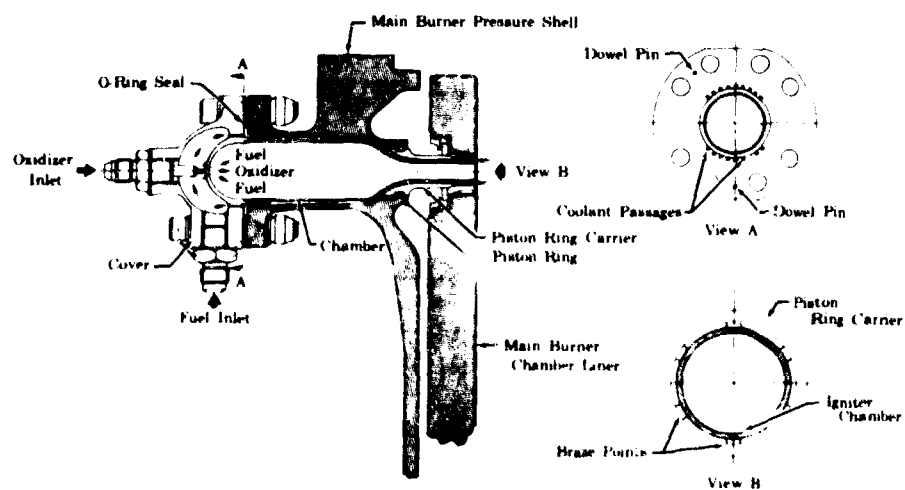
Main Burner Torch Assembly, Propellant Flow, Mounting and Sealing
